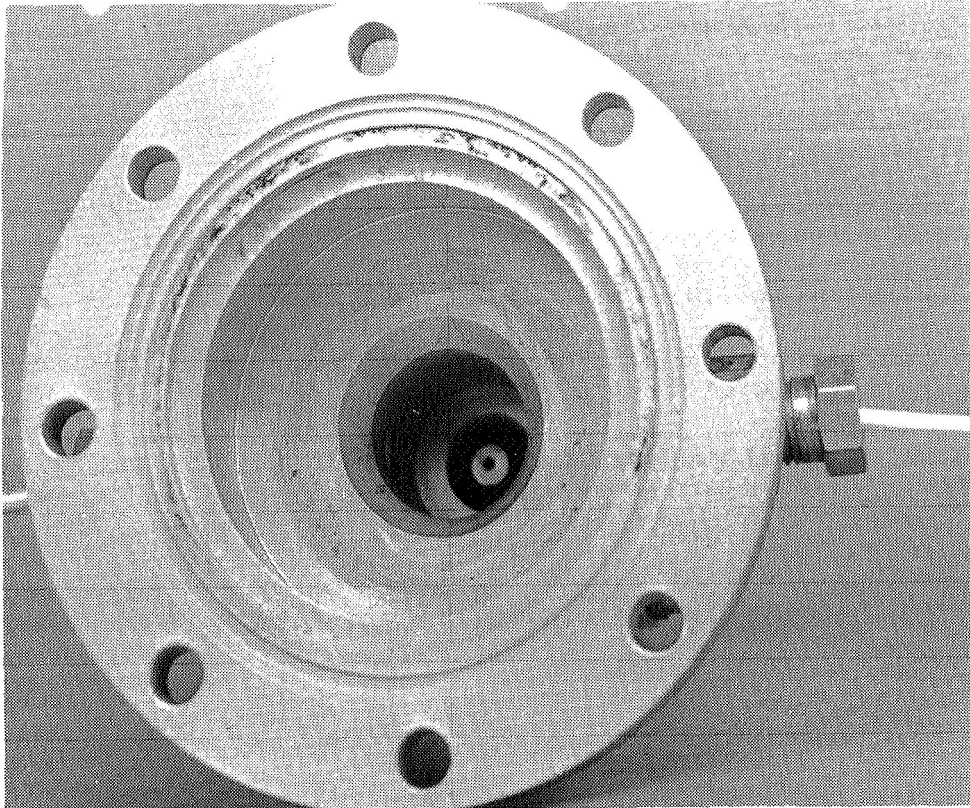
1 Valve Actuator Cap Interior After Task III Testing
